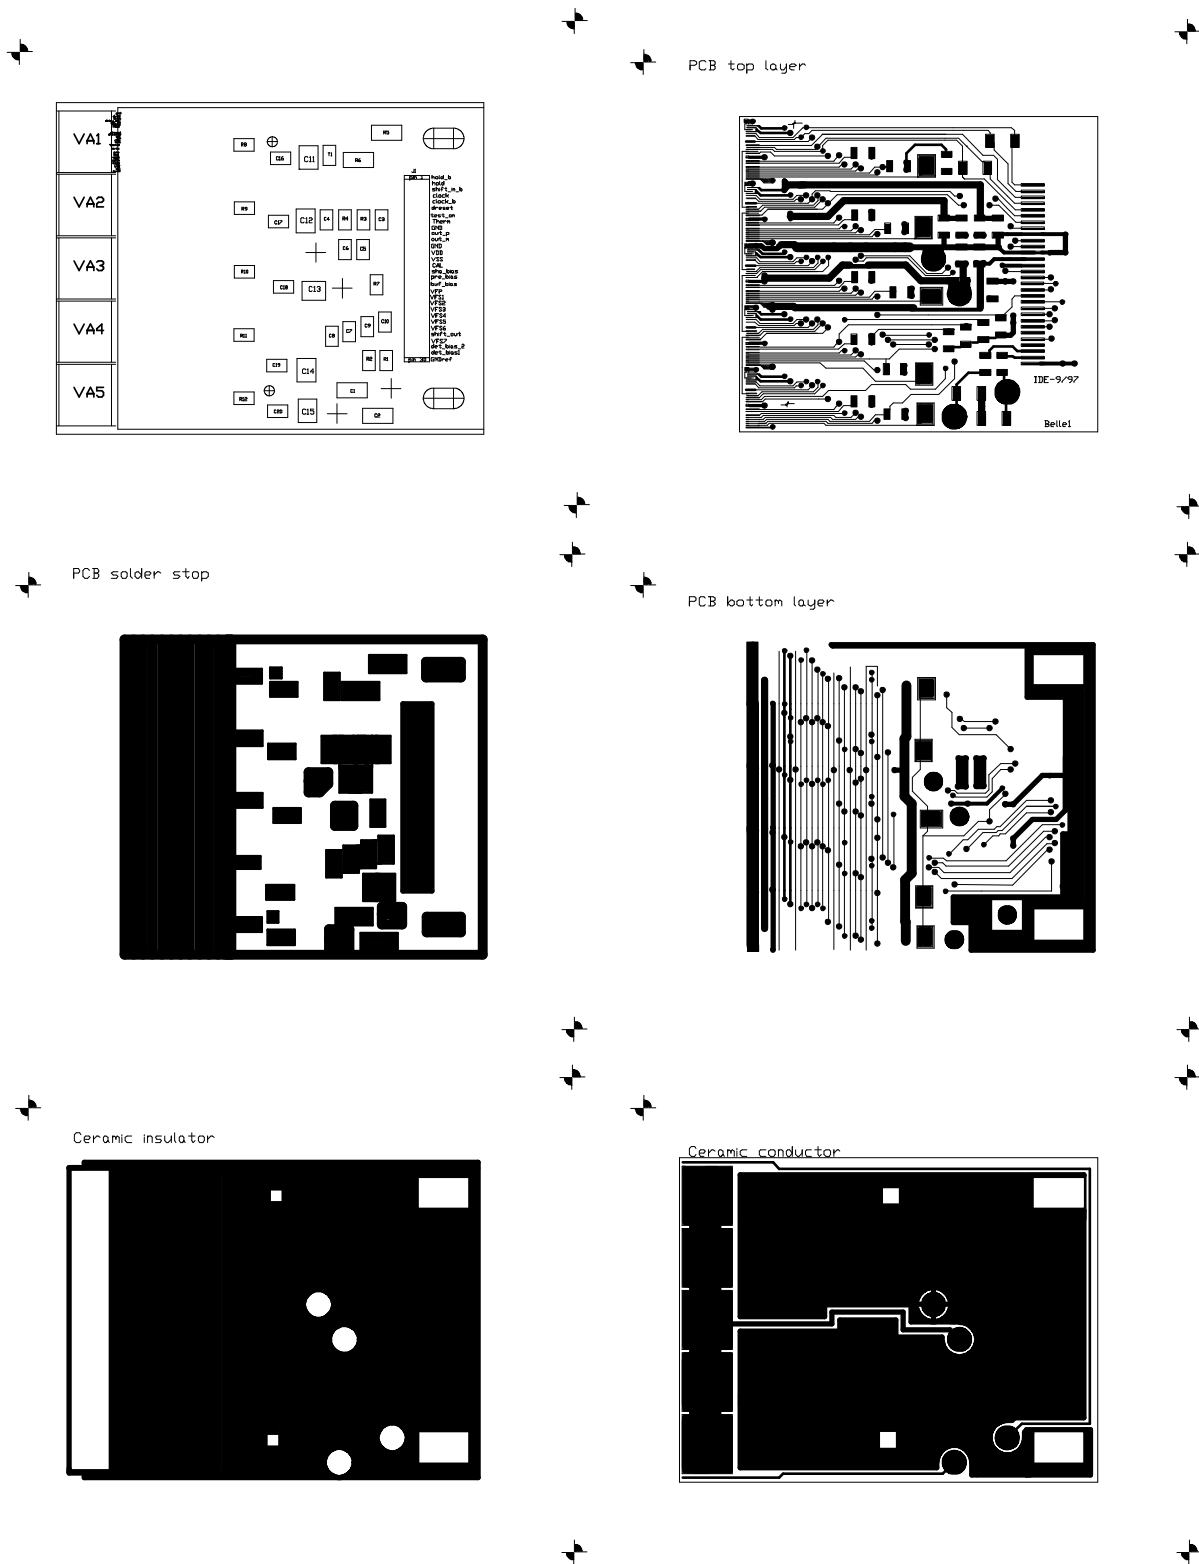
Belle composite (AlN/PCB) hybrid. Showing conducting and insulating layers.
